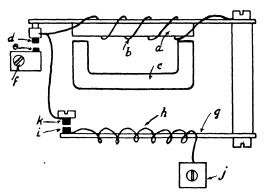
Arrangement of thermostatic device for opening the ignition circuit.
